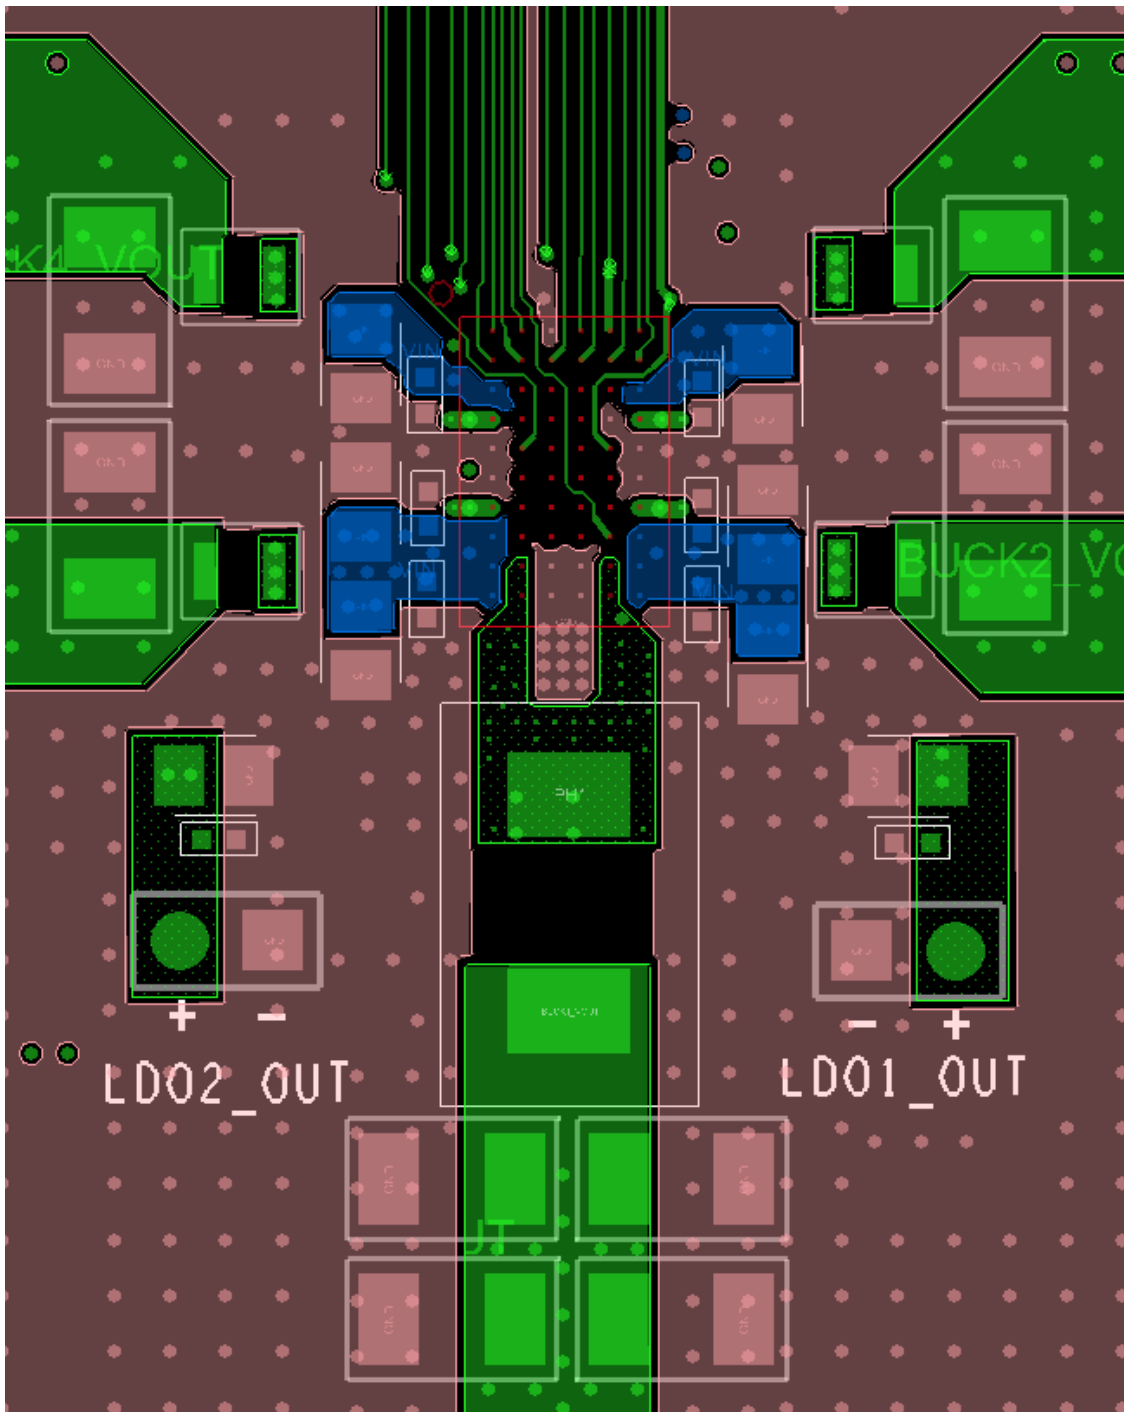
PCB Example 2, Top Layer with Staggered Vias
